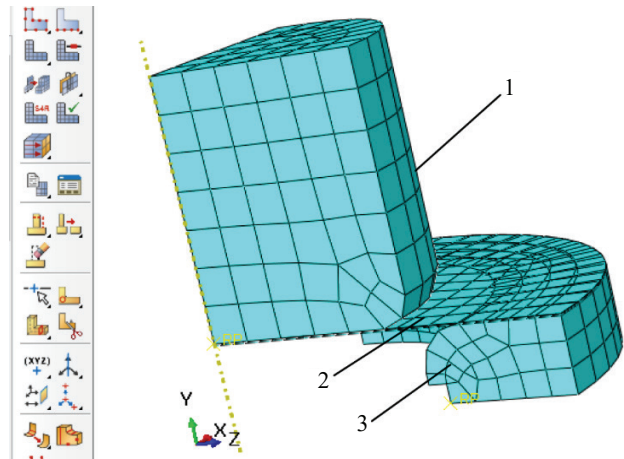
The finite-element model of drawing a cylindrical part: 1 – punch; 2 – blank; 3 – matrix
